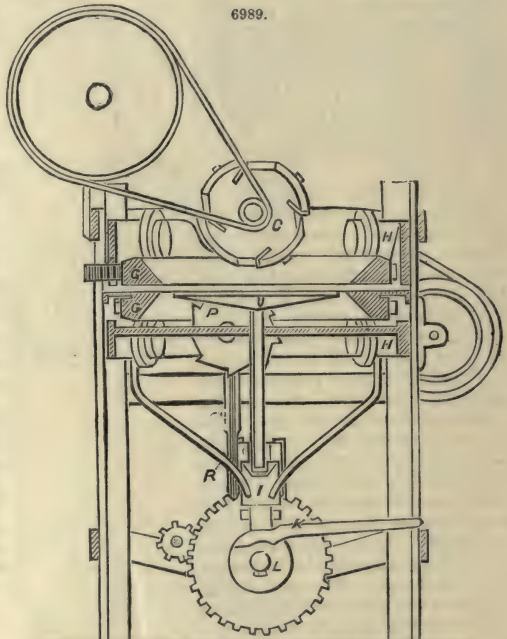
serves to illustrate the action of Alfred Beuster's barrel-heading machine.
